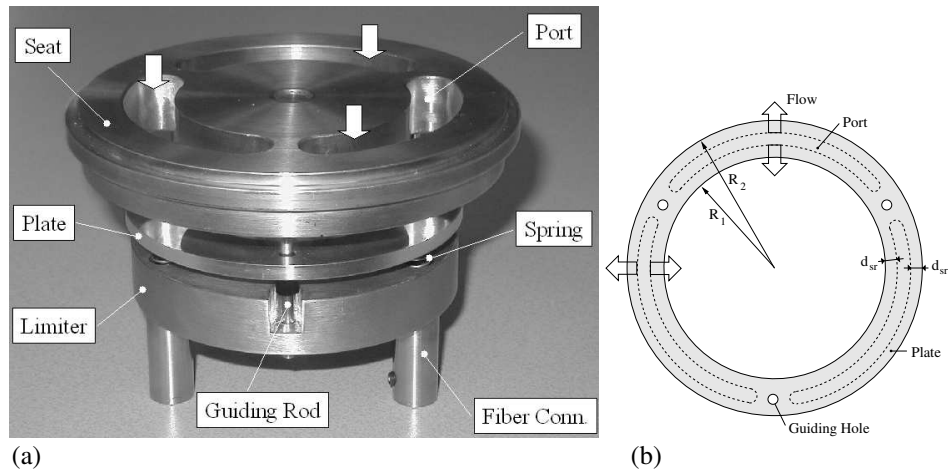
(a) Photograph of partially dismantled model valve. The flow direction is indicated with arrows. (b) Sketch of partial bottom view of photograph (R_1 is the inner radius and R_2 is the outer radius of the ring plate, d_{sr} is the sealing rim length).
